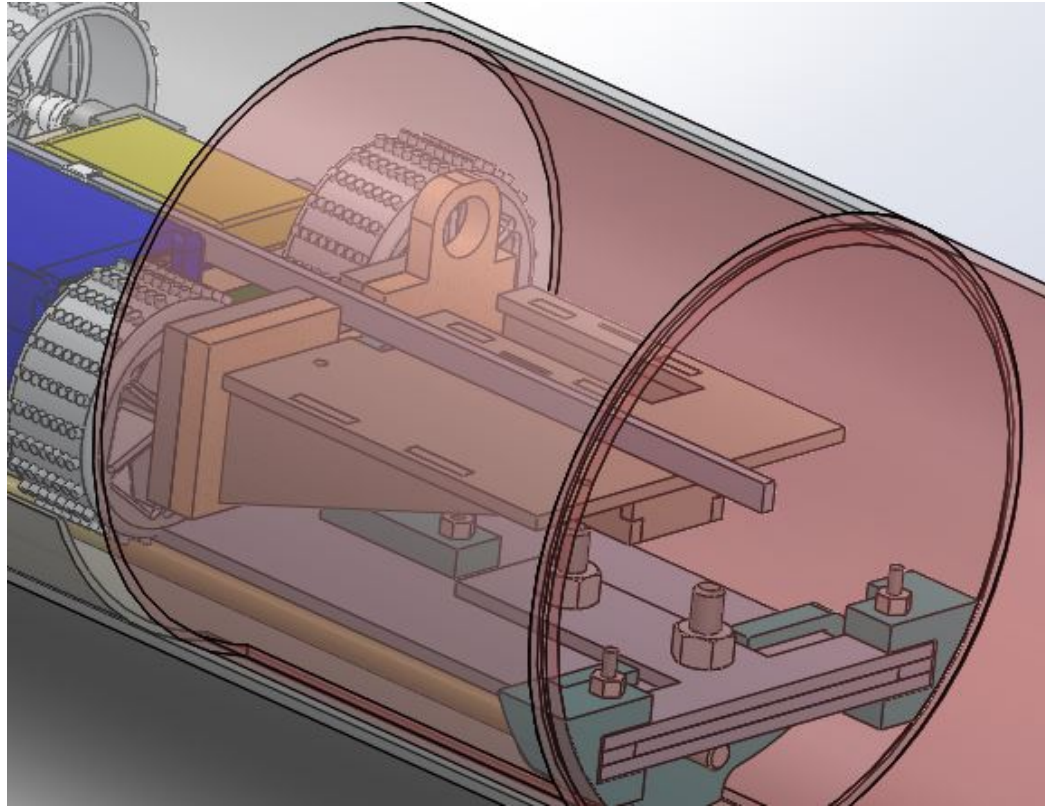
GPS Mount Assembly within Rover Housing Section
